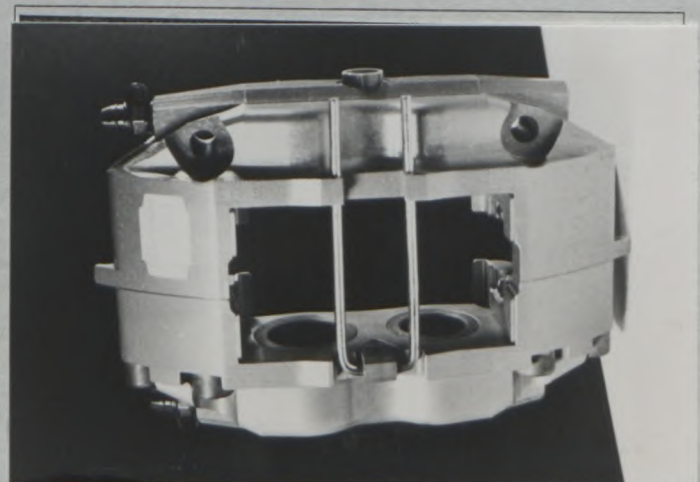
FRONT AND/OR REAR BRAKE CALIPER TYPE C, J
